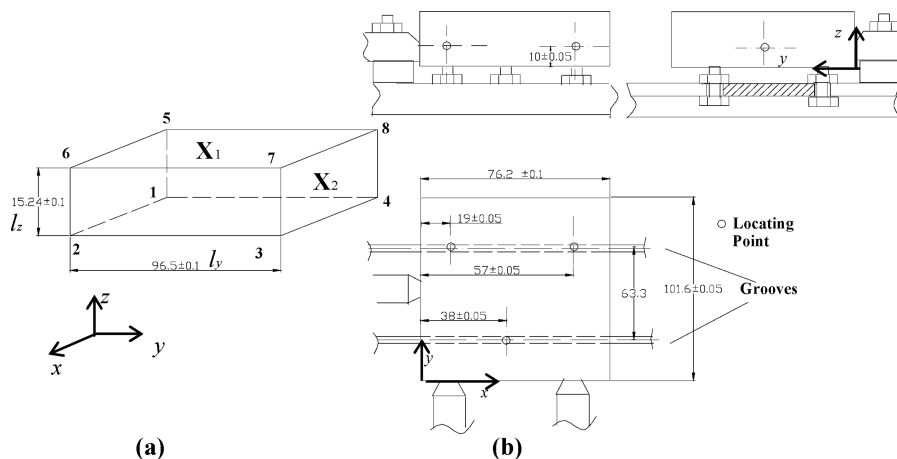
Nominal part, tolerance, and fixture layout (after Wang *et al.* (2005)).
